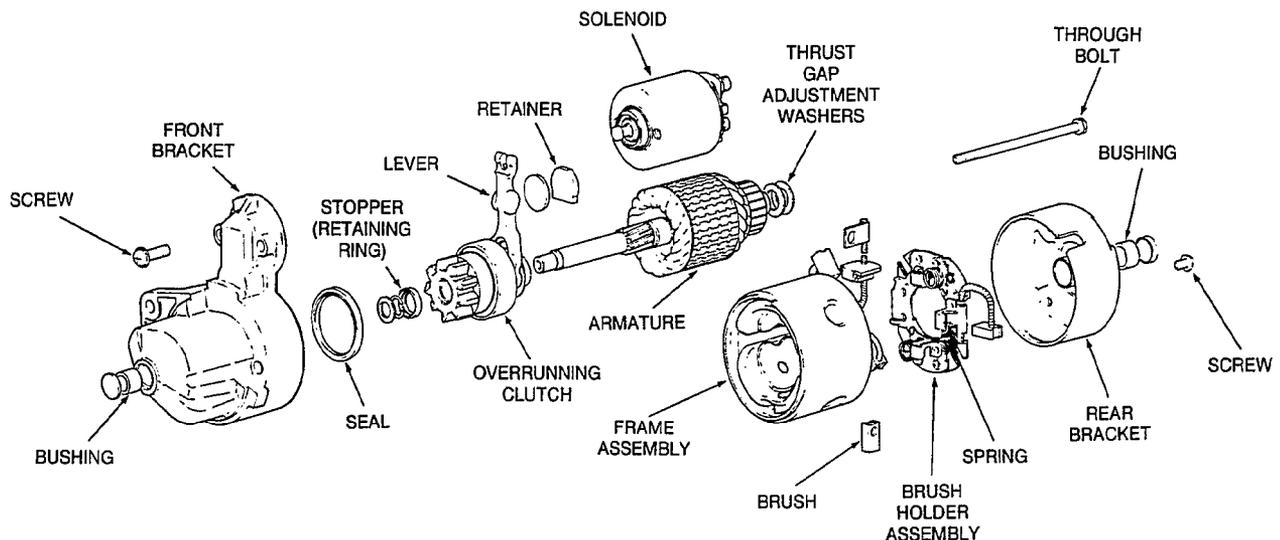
STARTER MOTOR (SOLENOID SHIFT TYPE)
